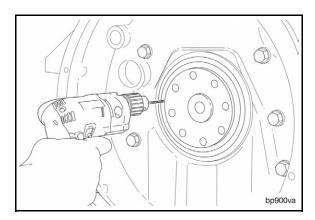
DRILL TWO HOLES INTO THE SEAL CARRIER
